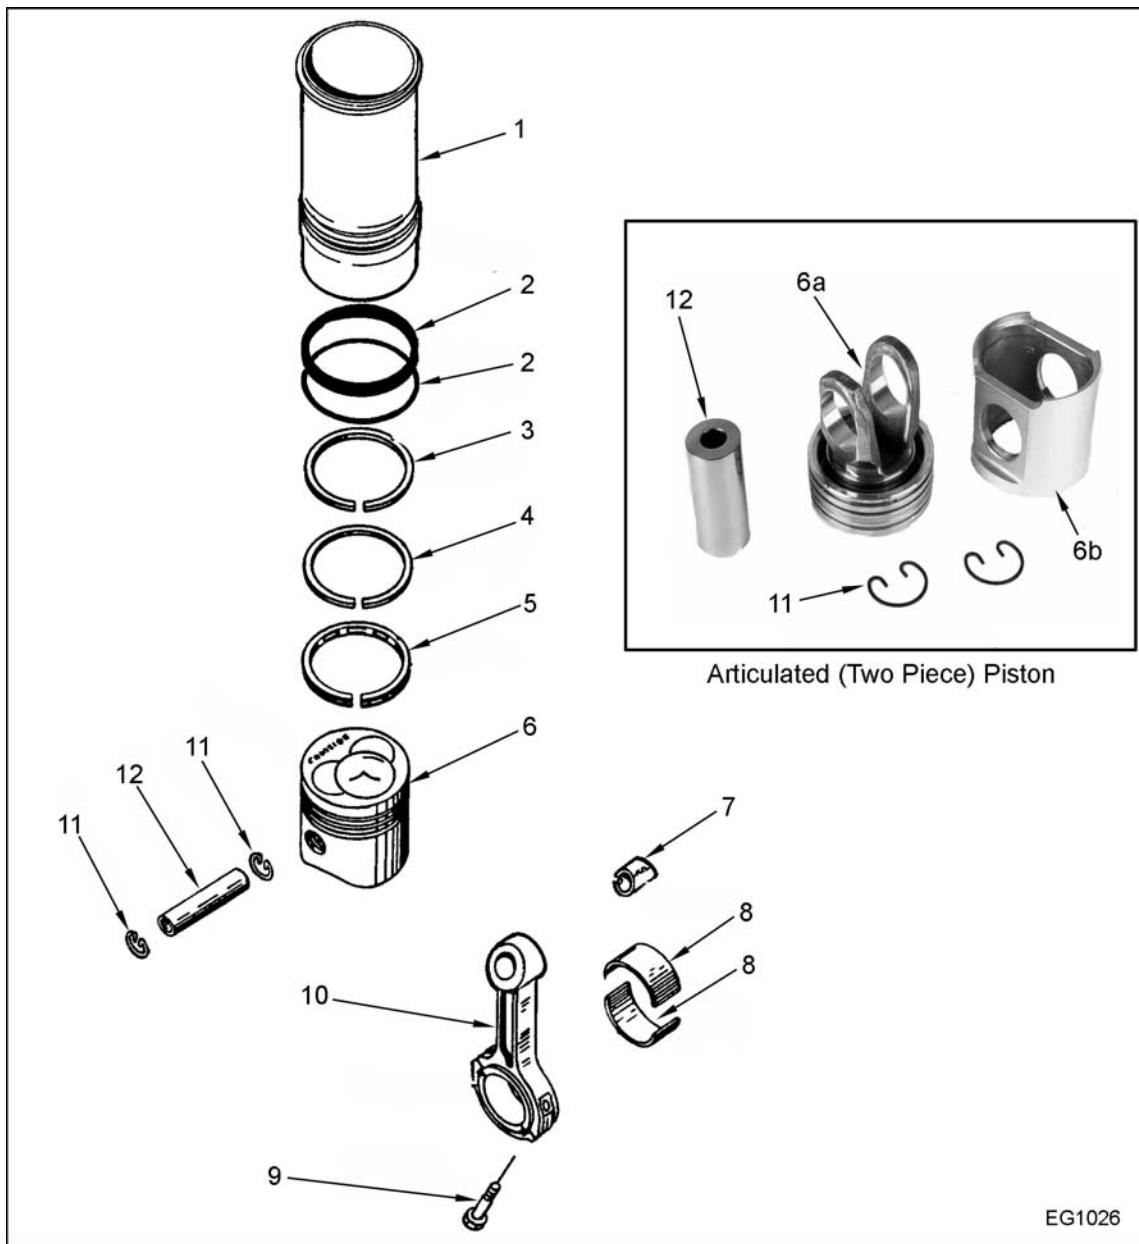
Connecting Rods, Pistons, Ring, and Sleeves
